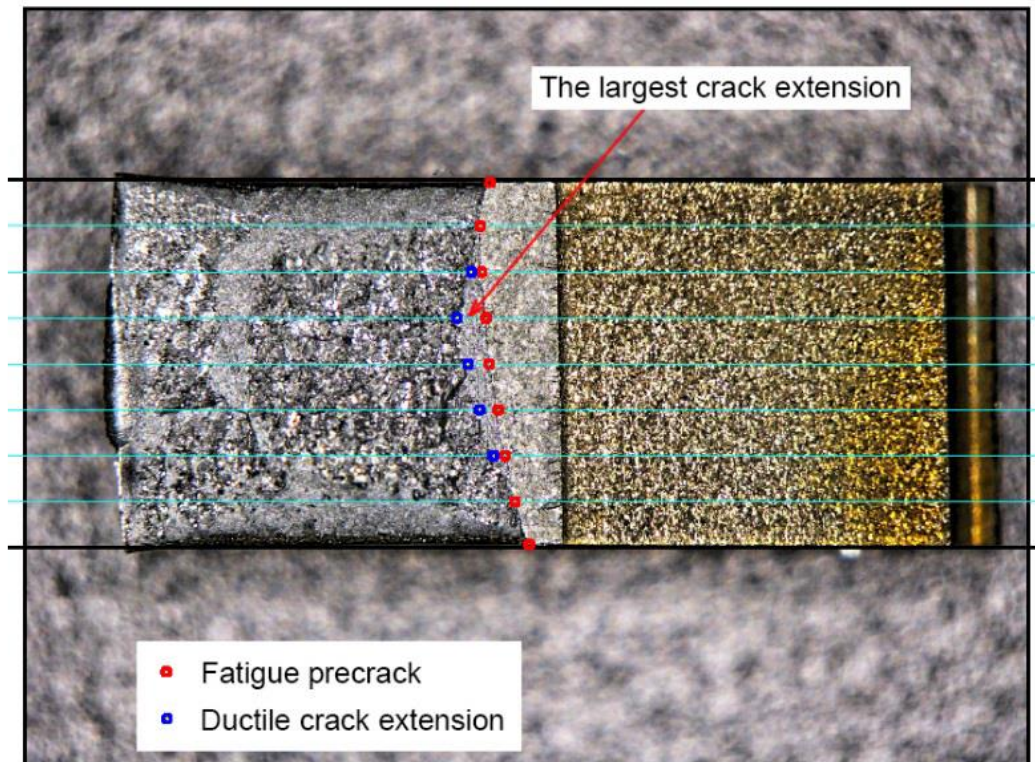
Notch, fatigue pre-crack and ductile crack extension on the fractography picture of a mini-CT specimen [2].
